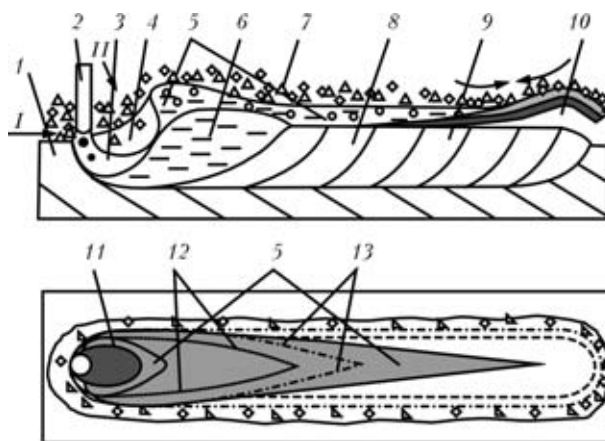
Precised schematic of the process of electric submerged-arc welding: 1 – base metal; 2 – electrode metal; 3 – arc plume; 4 – crater; 5 – liquid slag and its extended tail; 6 – weld pool; 7 – flux; 8 – weld; 9 – glass-like, wedge-like solidifying slag layer; 10 – crystalline layer of solidifying slag; 11 – crater zone not covered by liquid slag; 12, 13 – line of melting isotherm of flux and slag, respectively; I, II – ways of flux penetration into the arc
